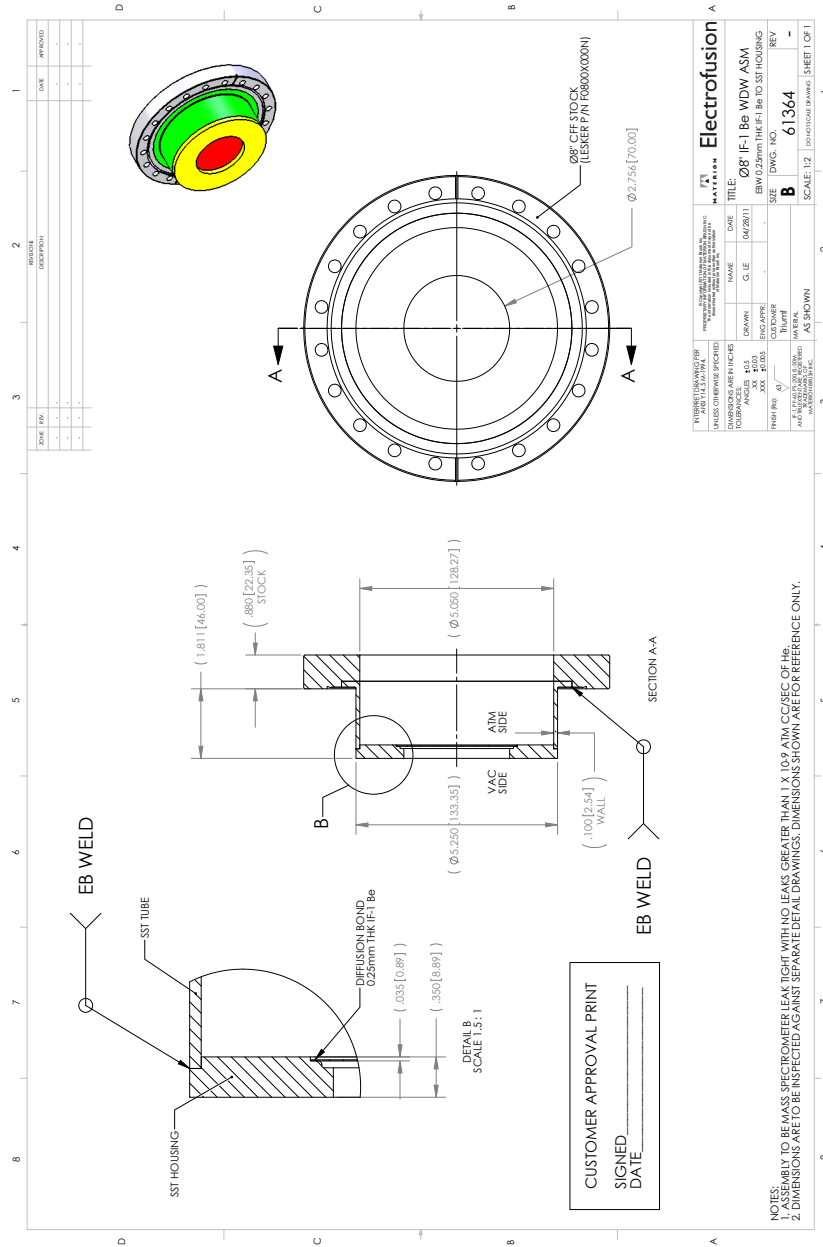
Technical drawing of the 8" diameter Be-window assembly [172].
